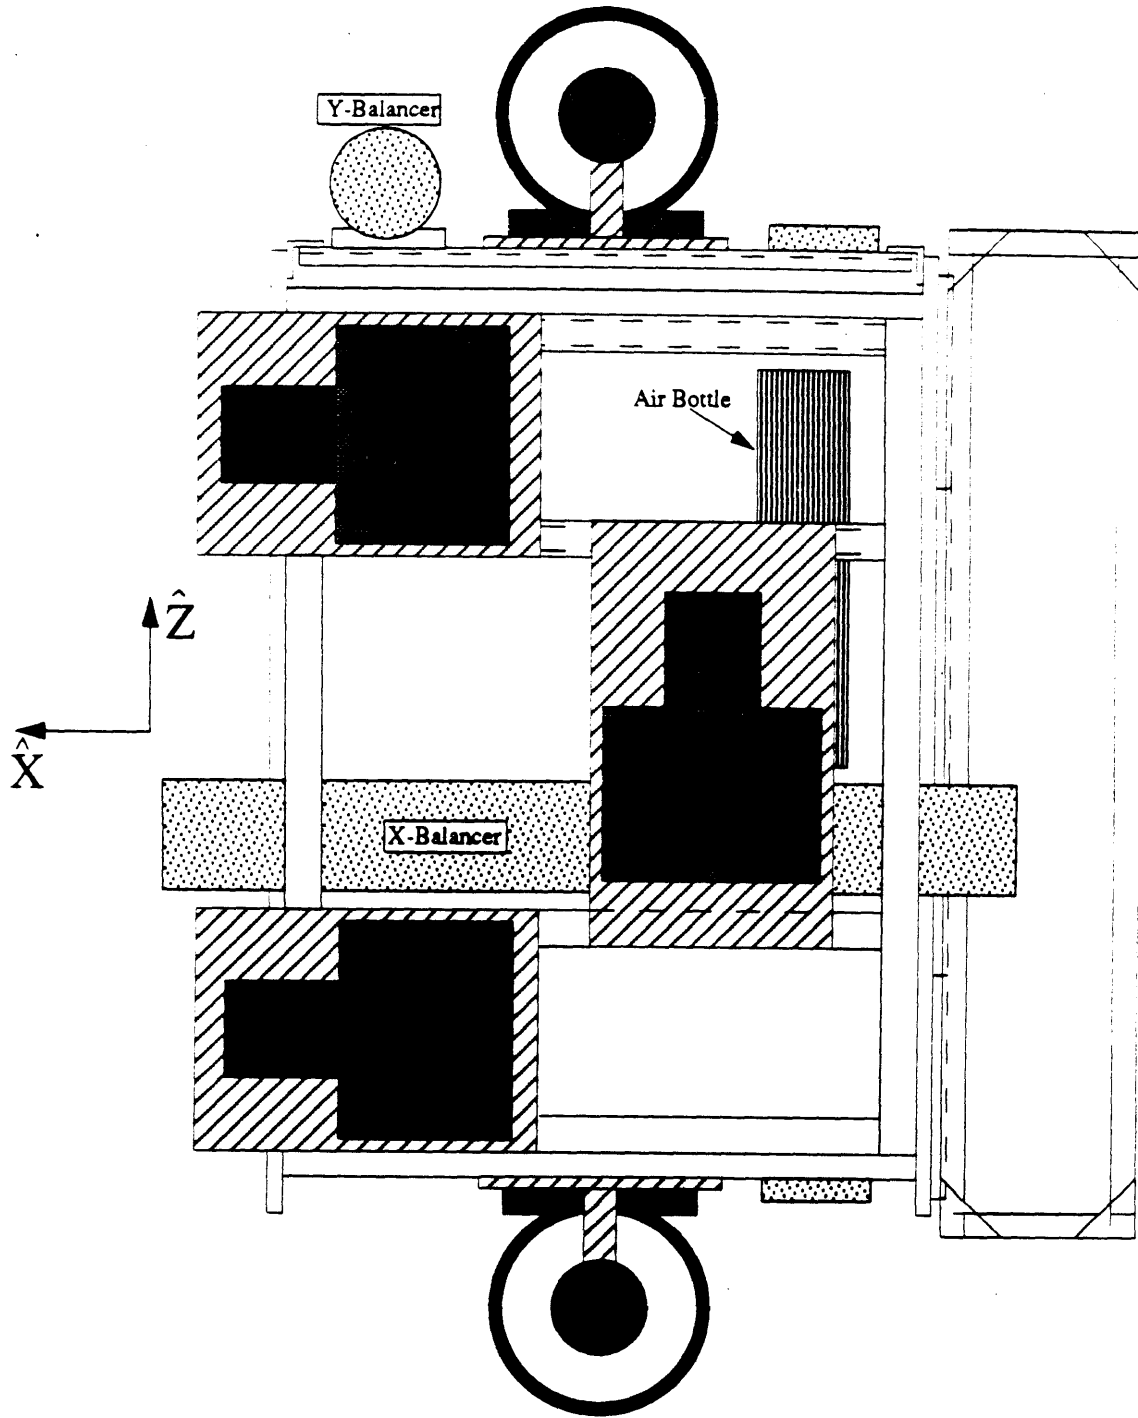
Side View of STAR Thruster and Balancer Layout
